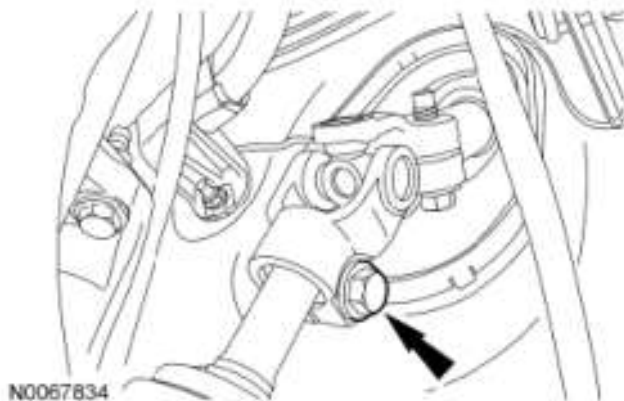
Locating Steering Column Coupling Pinch Bolt
